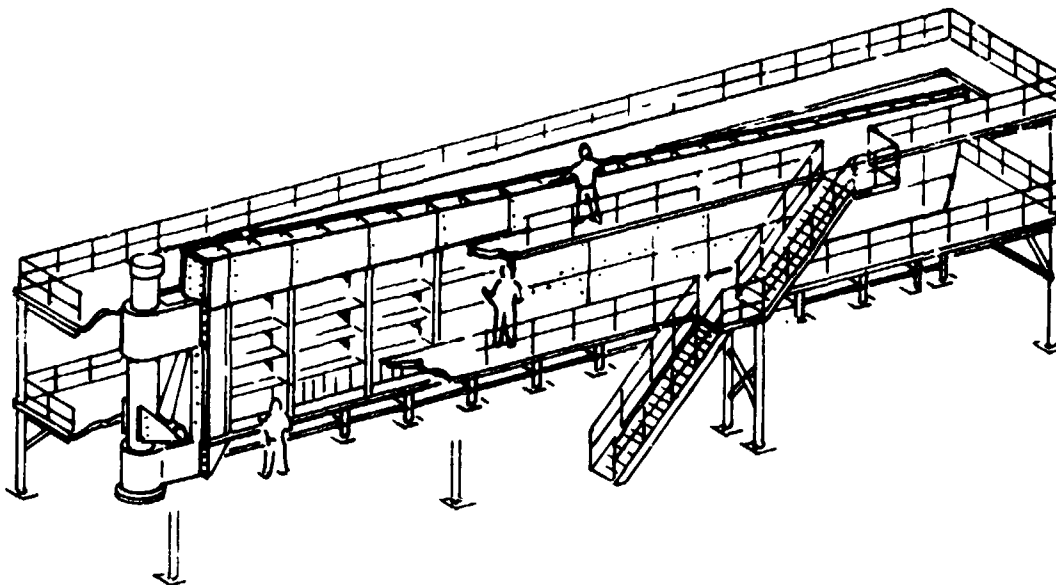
FR-4 Wing Primary Assembly Fixture
